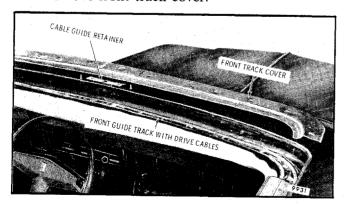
Removing Front Track Cover and Cable Guide Retainer - C Styles
